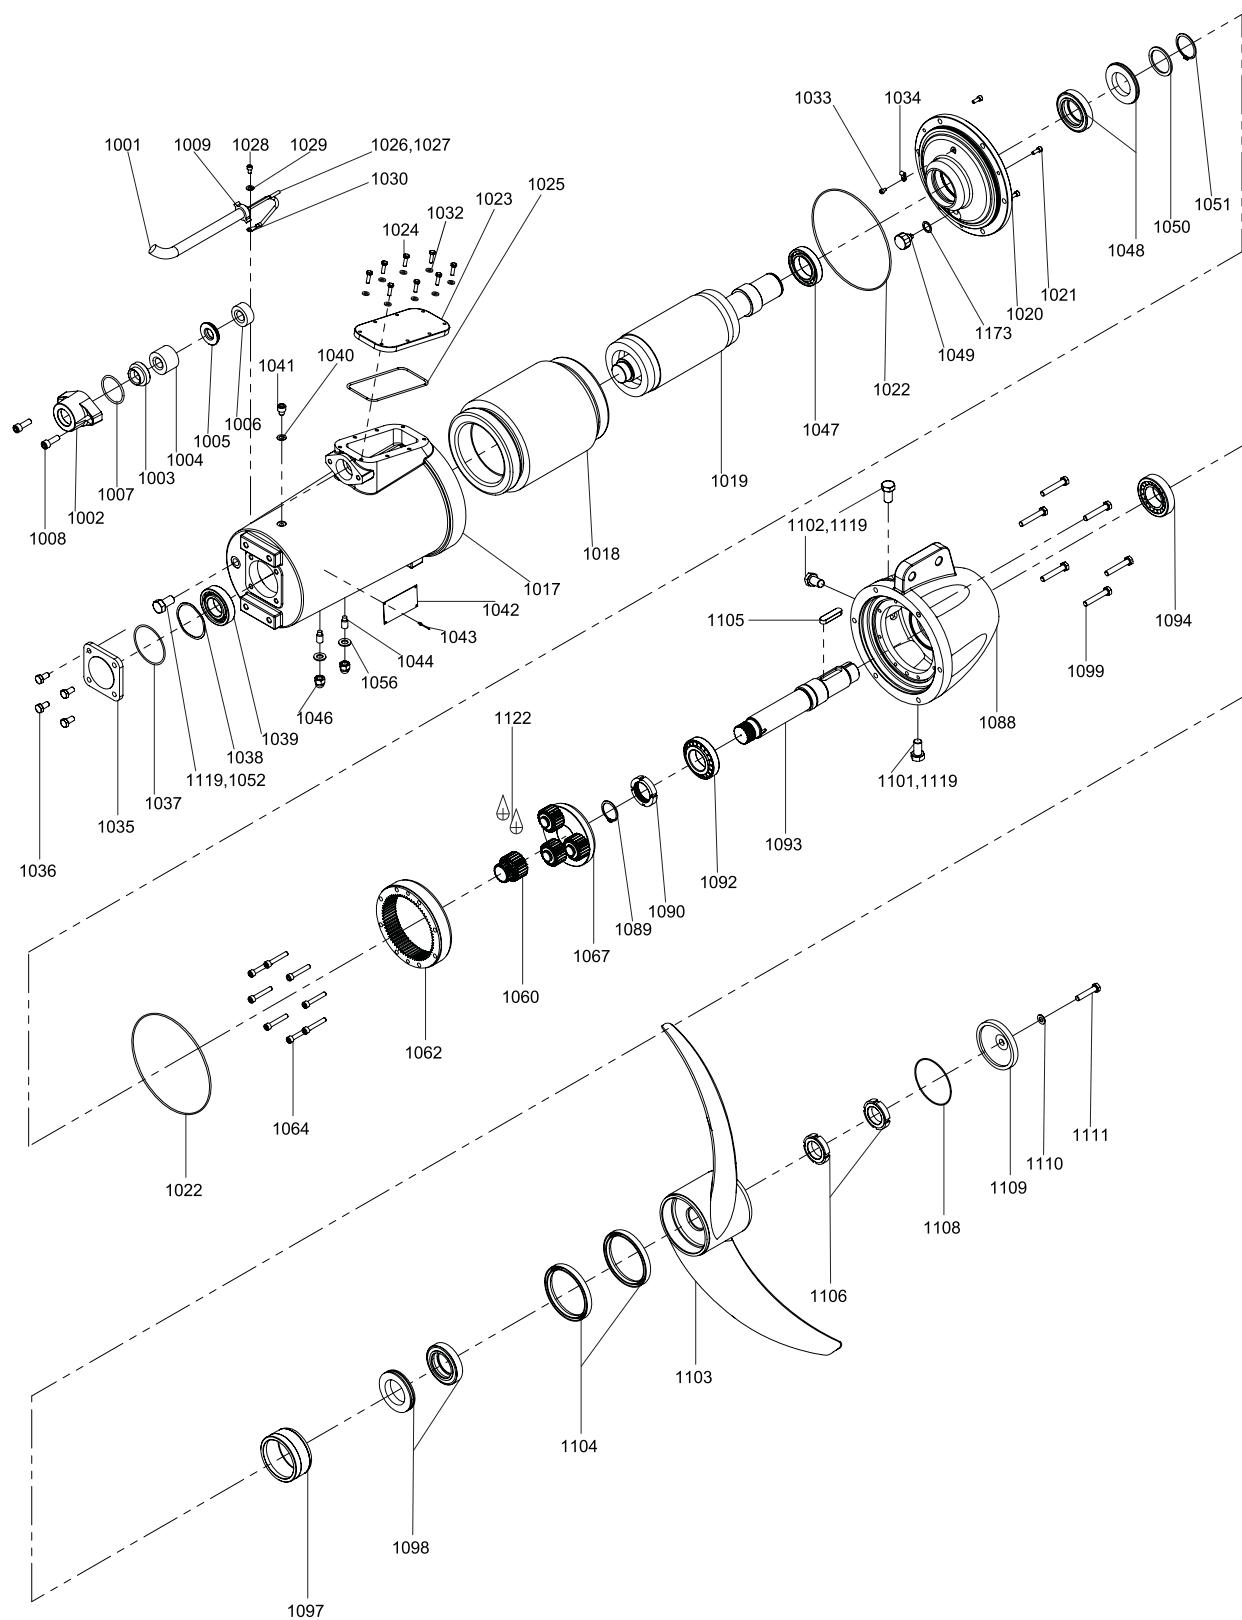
Exploded view, SMG.12.xx to SMG.55.xx
